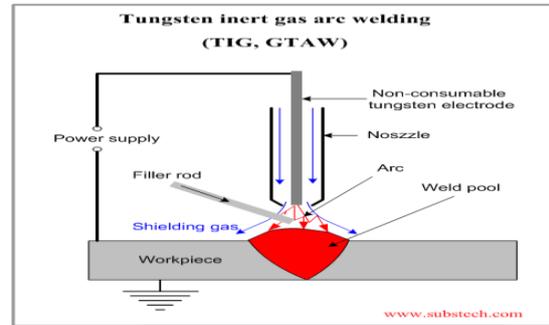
Tungsten Inert Gas Arc Welding
